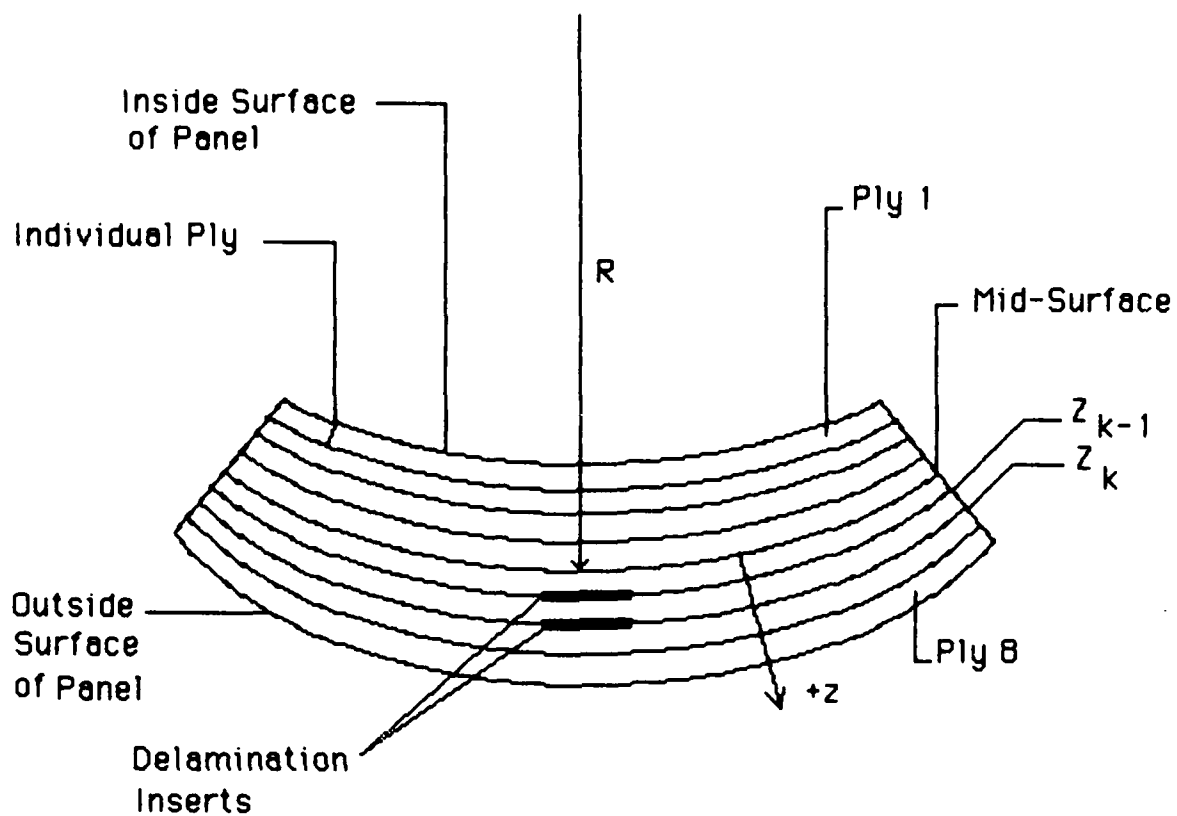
Cross Section of Panel Q22 at Delamination Locations
